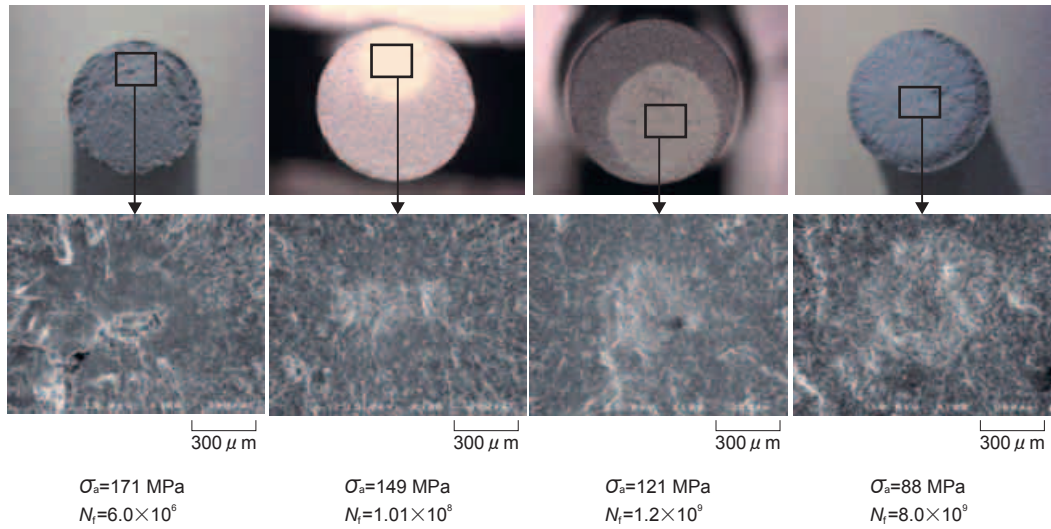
SEM micrographs of fracture surface (Internal casting defect)
